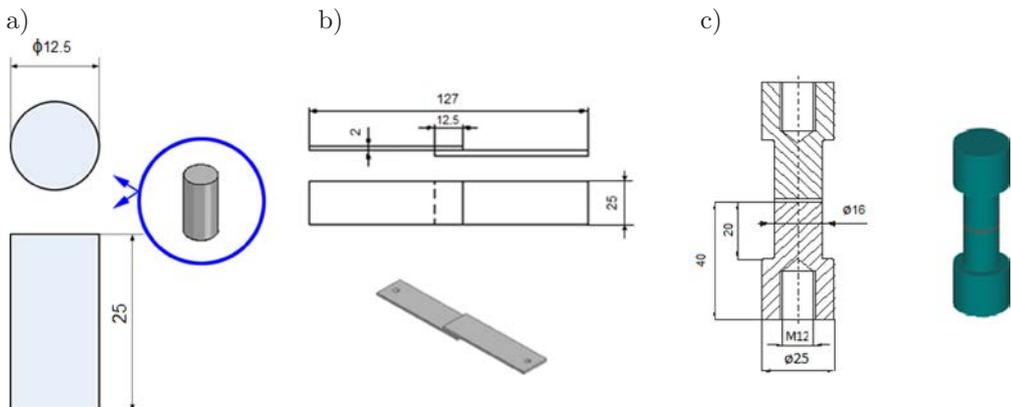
Shape and dimensions of specimens used to determine properties of adhesive composites.
